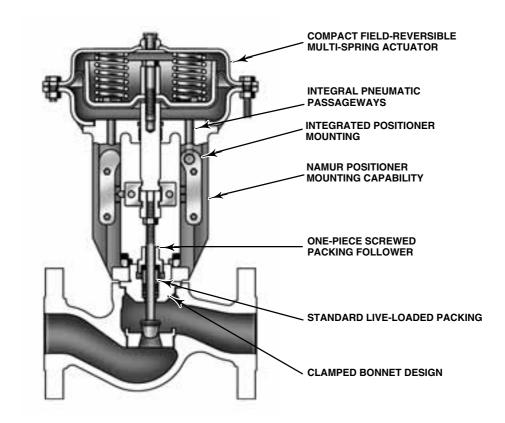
Design GX Control Valve Assembly with Stem-Guided Contoured Plug (Size DN 25/1-Inch)
